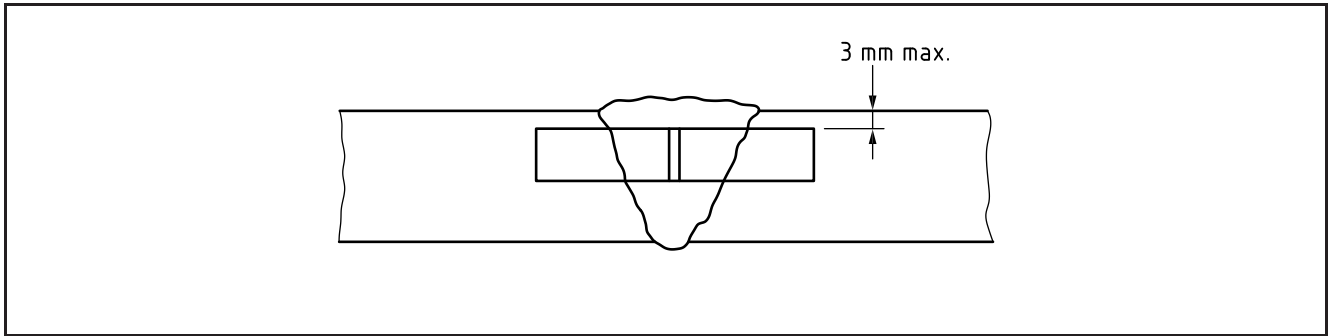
Location of Charpy V-notch specimens in weld metal (stress relieved vessels)
